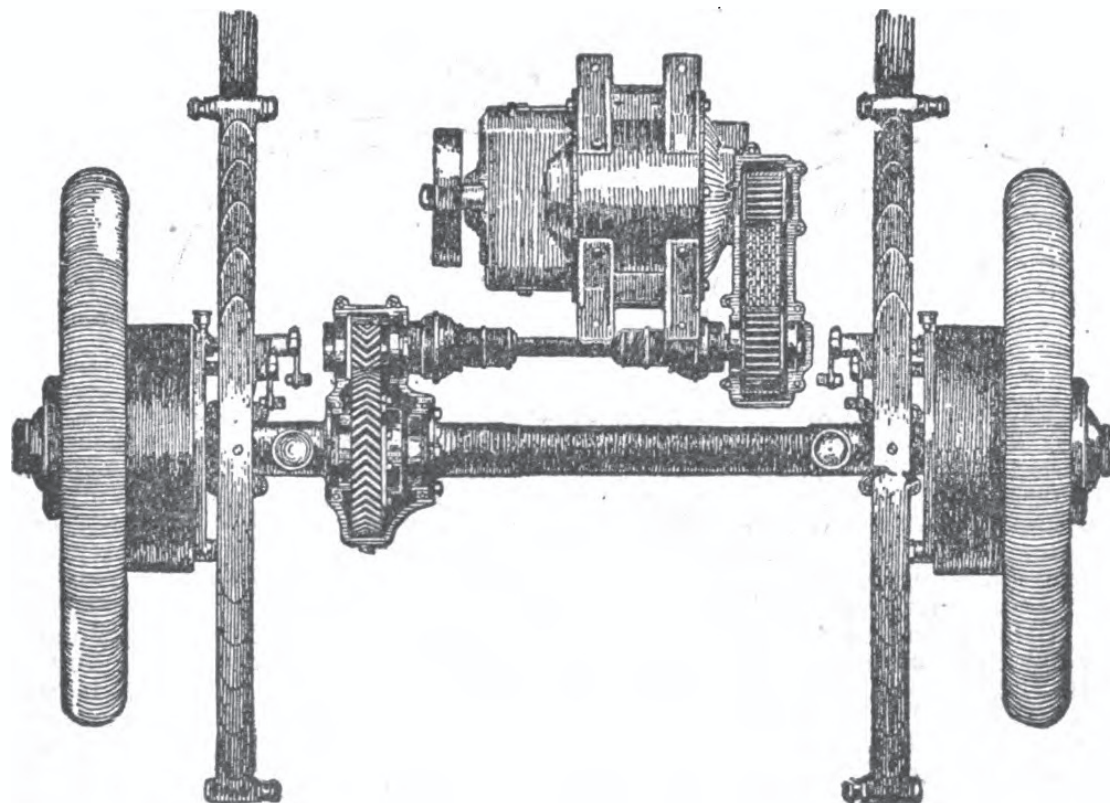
,070.—Waverly double reduction gear or combination herringbone gear and “silent” chain. *In construction* the motor shaft is parallel to the intermediate or jack shaft and drive shaft. Two universal joints are used, so as to give freedom of motion in any direction. The motor weight is above the springs. The first reduction is by the silent chain enclosed in a casing at end of motor; the second reduction is through the herringbone gear in the axle.
